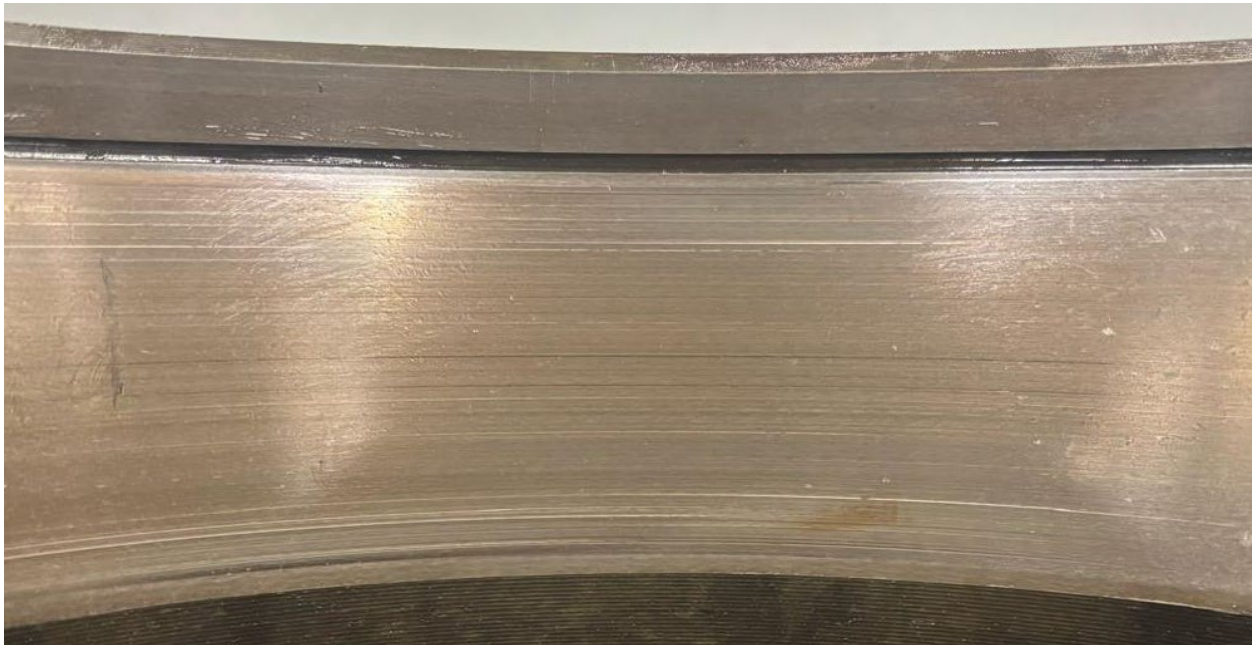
B3 (6-Month) bearing cup IB raceway on loaded side
